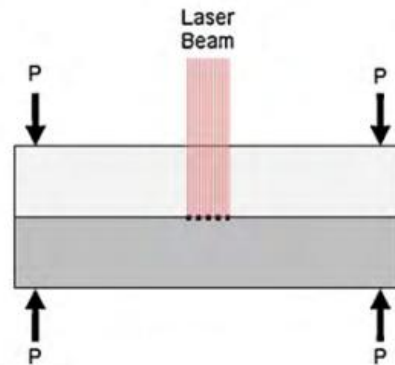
Transmission Laser Welding (TLW)
